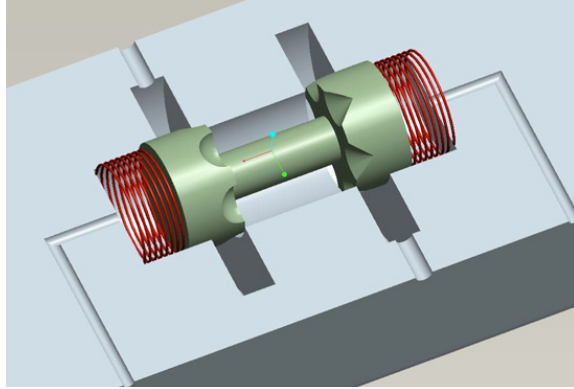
CAD model showing the valve body and the spool with the notches.
